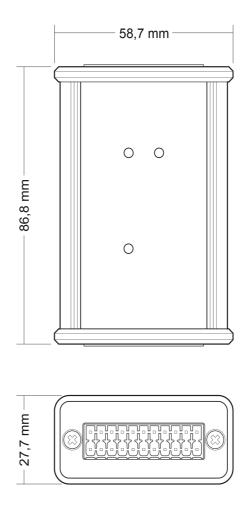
Dimension drawing with top view and side view. The scale of the drawings differs from an 1-to-1 representation.
